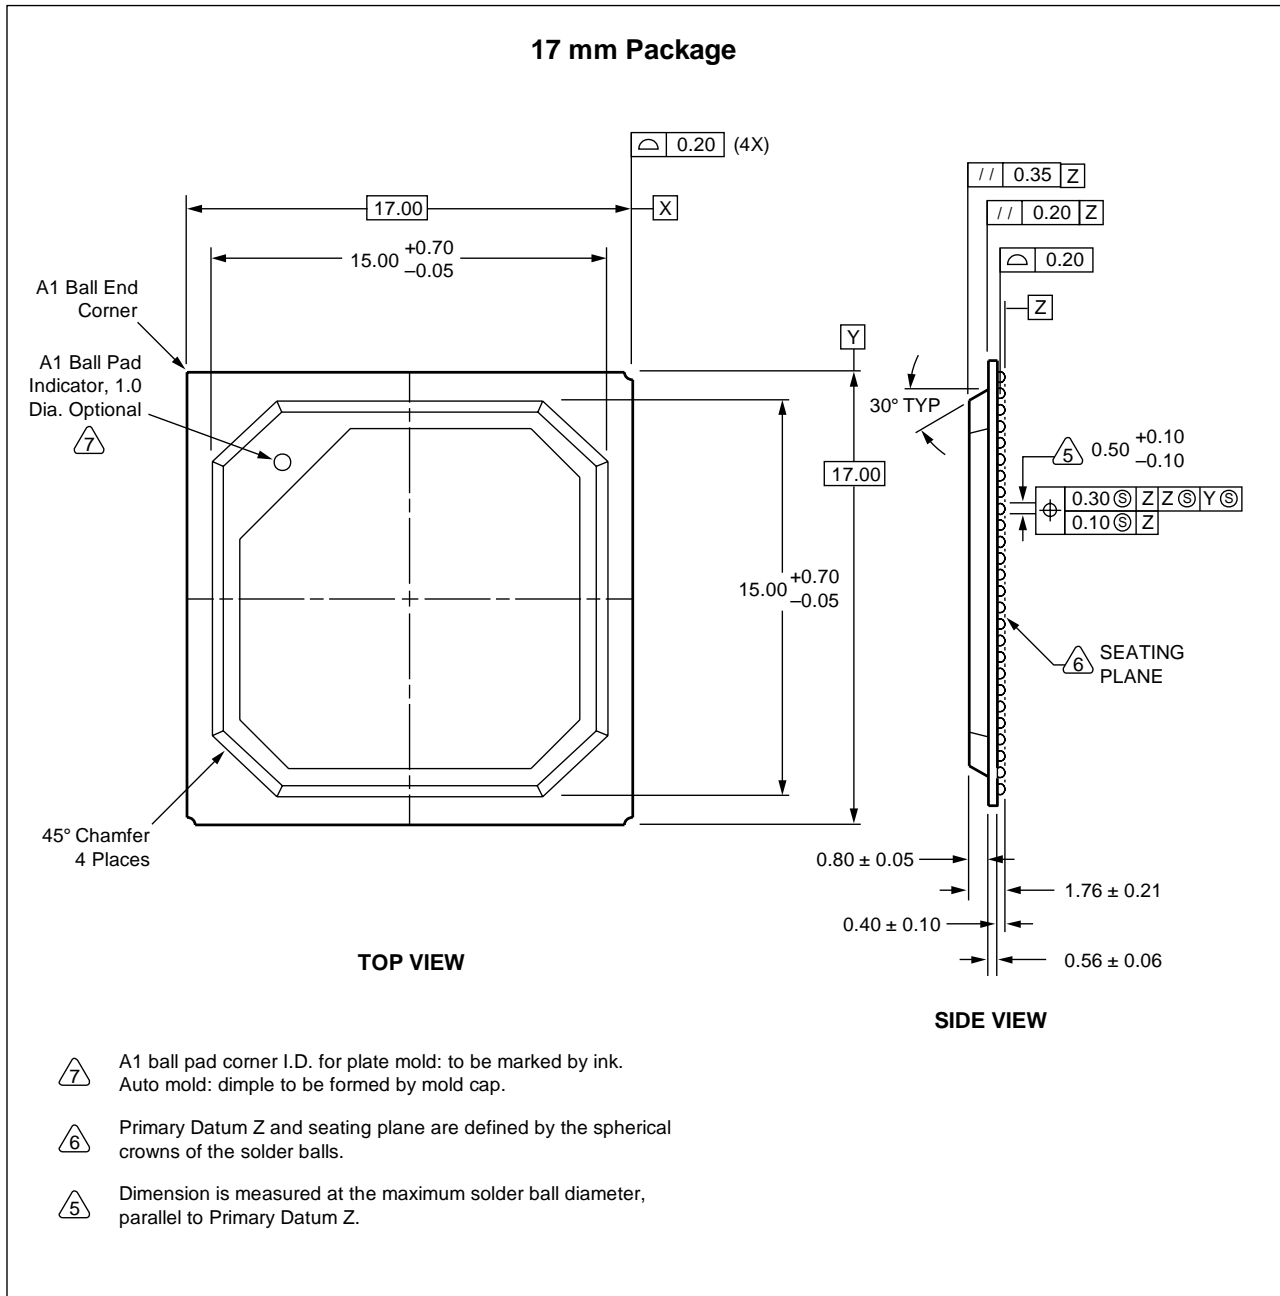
M28228 17 mm Mechanical Drawing (Top and Side Views)
